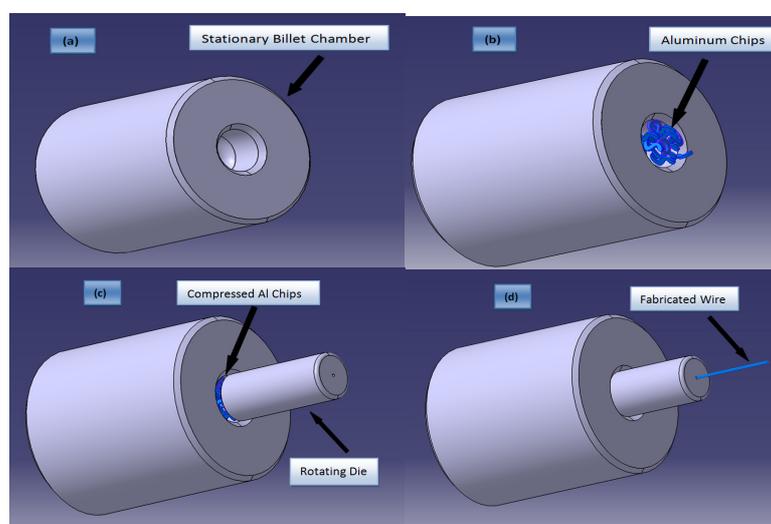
Schematic of friction stir extrusion process to produce aluminum wires from chips
